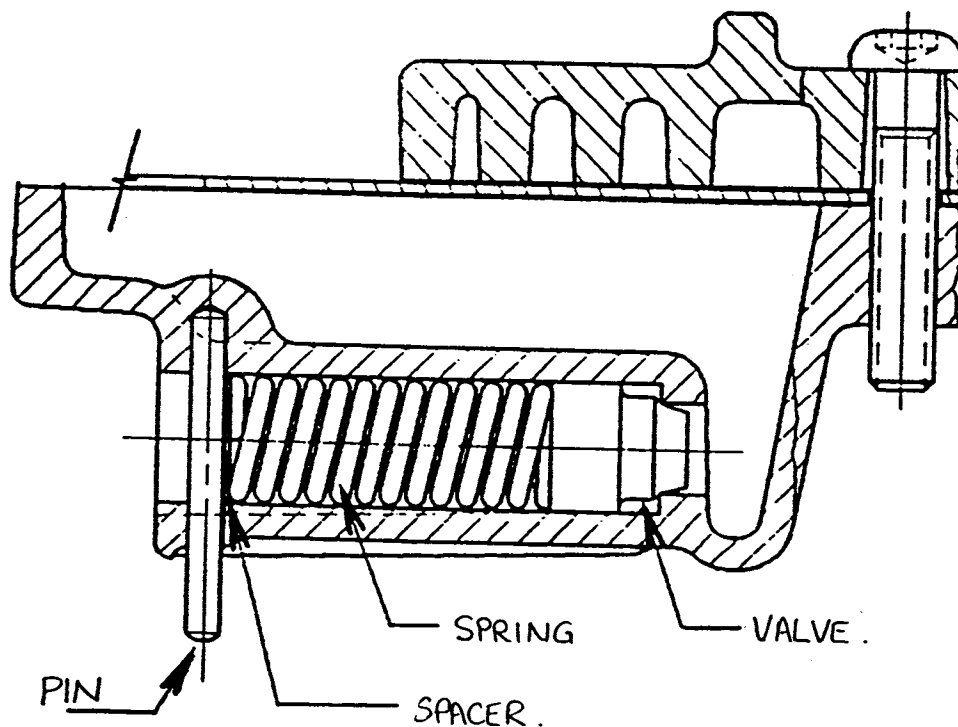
LINE RELIEF VALVE ASSEMBLY.
